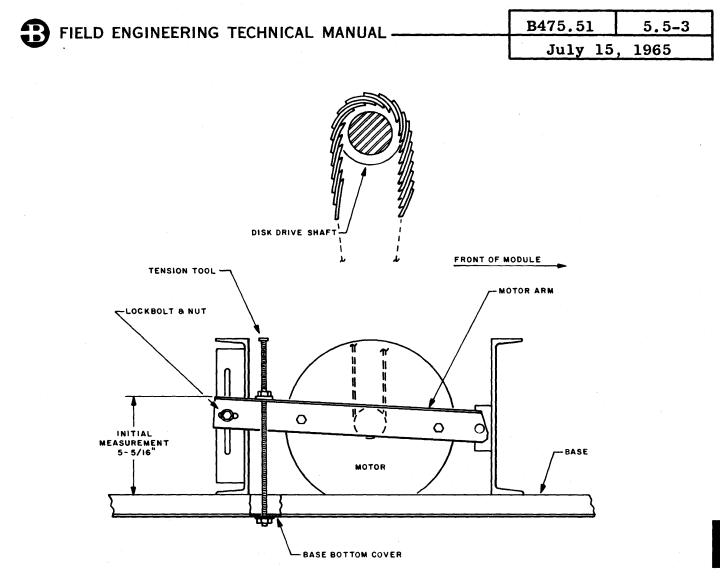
BELT ADJUSTMENT-INITIAL
